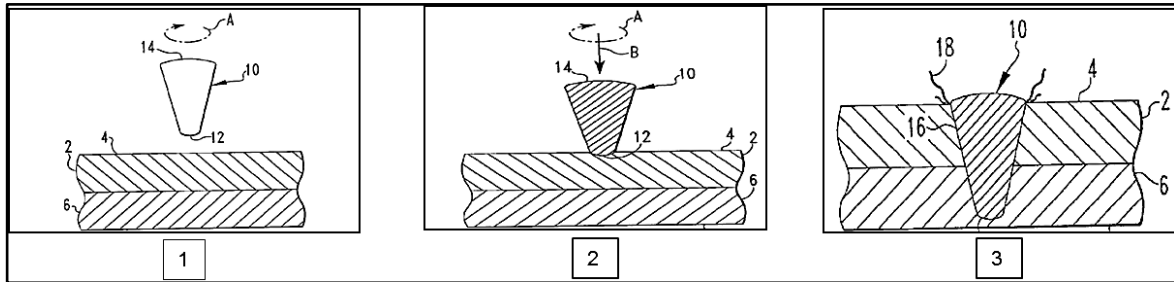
Friction Plunge Riveting 1) rotating rivet, 2) rivet penetration into plates and 3) Plates joined together [28]
